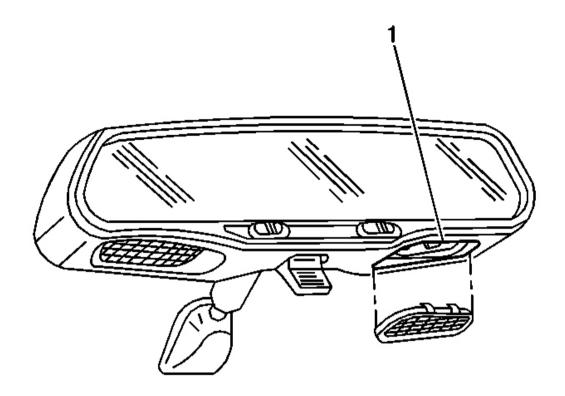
Lamp Lens To Mirror Housing Courtesy of GENERAL MOTORS CORP.
